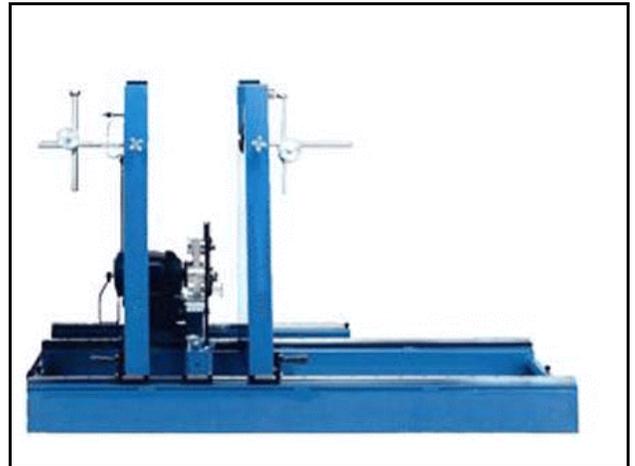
A typical "soft bearing" design balancing stand. Each pedestal contains a hanging cradle suspension that allows the rotor to swing freely during balancing. Balancing with this type stand can be a time consuming trial and error method using trial weights and requiring multiple runs per plane. Balancing overhung rotors is very difficult and unsafe.
